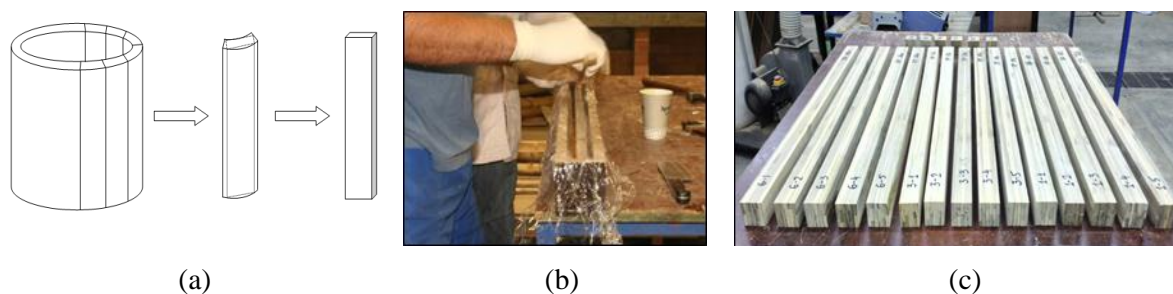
Fabrication – (a) cutting into strips, (b) layout on formwork, and (c) fabricated specimens
